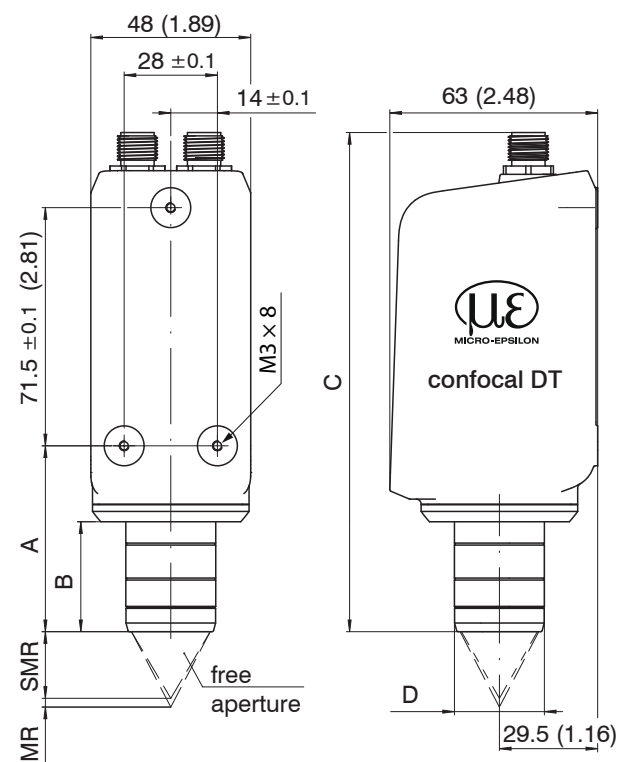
Dimensional drawing IFD2410 / IFD2415, dimensions in mm
